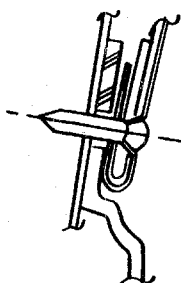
Typical Door Trim Panel Assembly Attachment - "C" Styles Shown "K" and Buick 4BZ37 Similar
